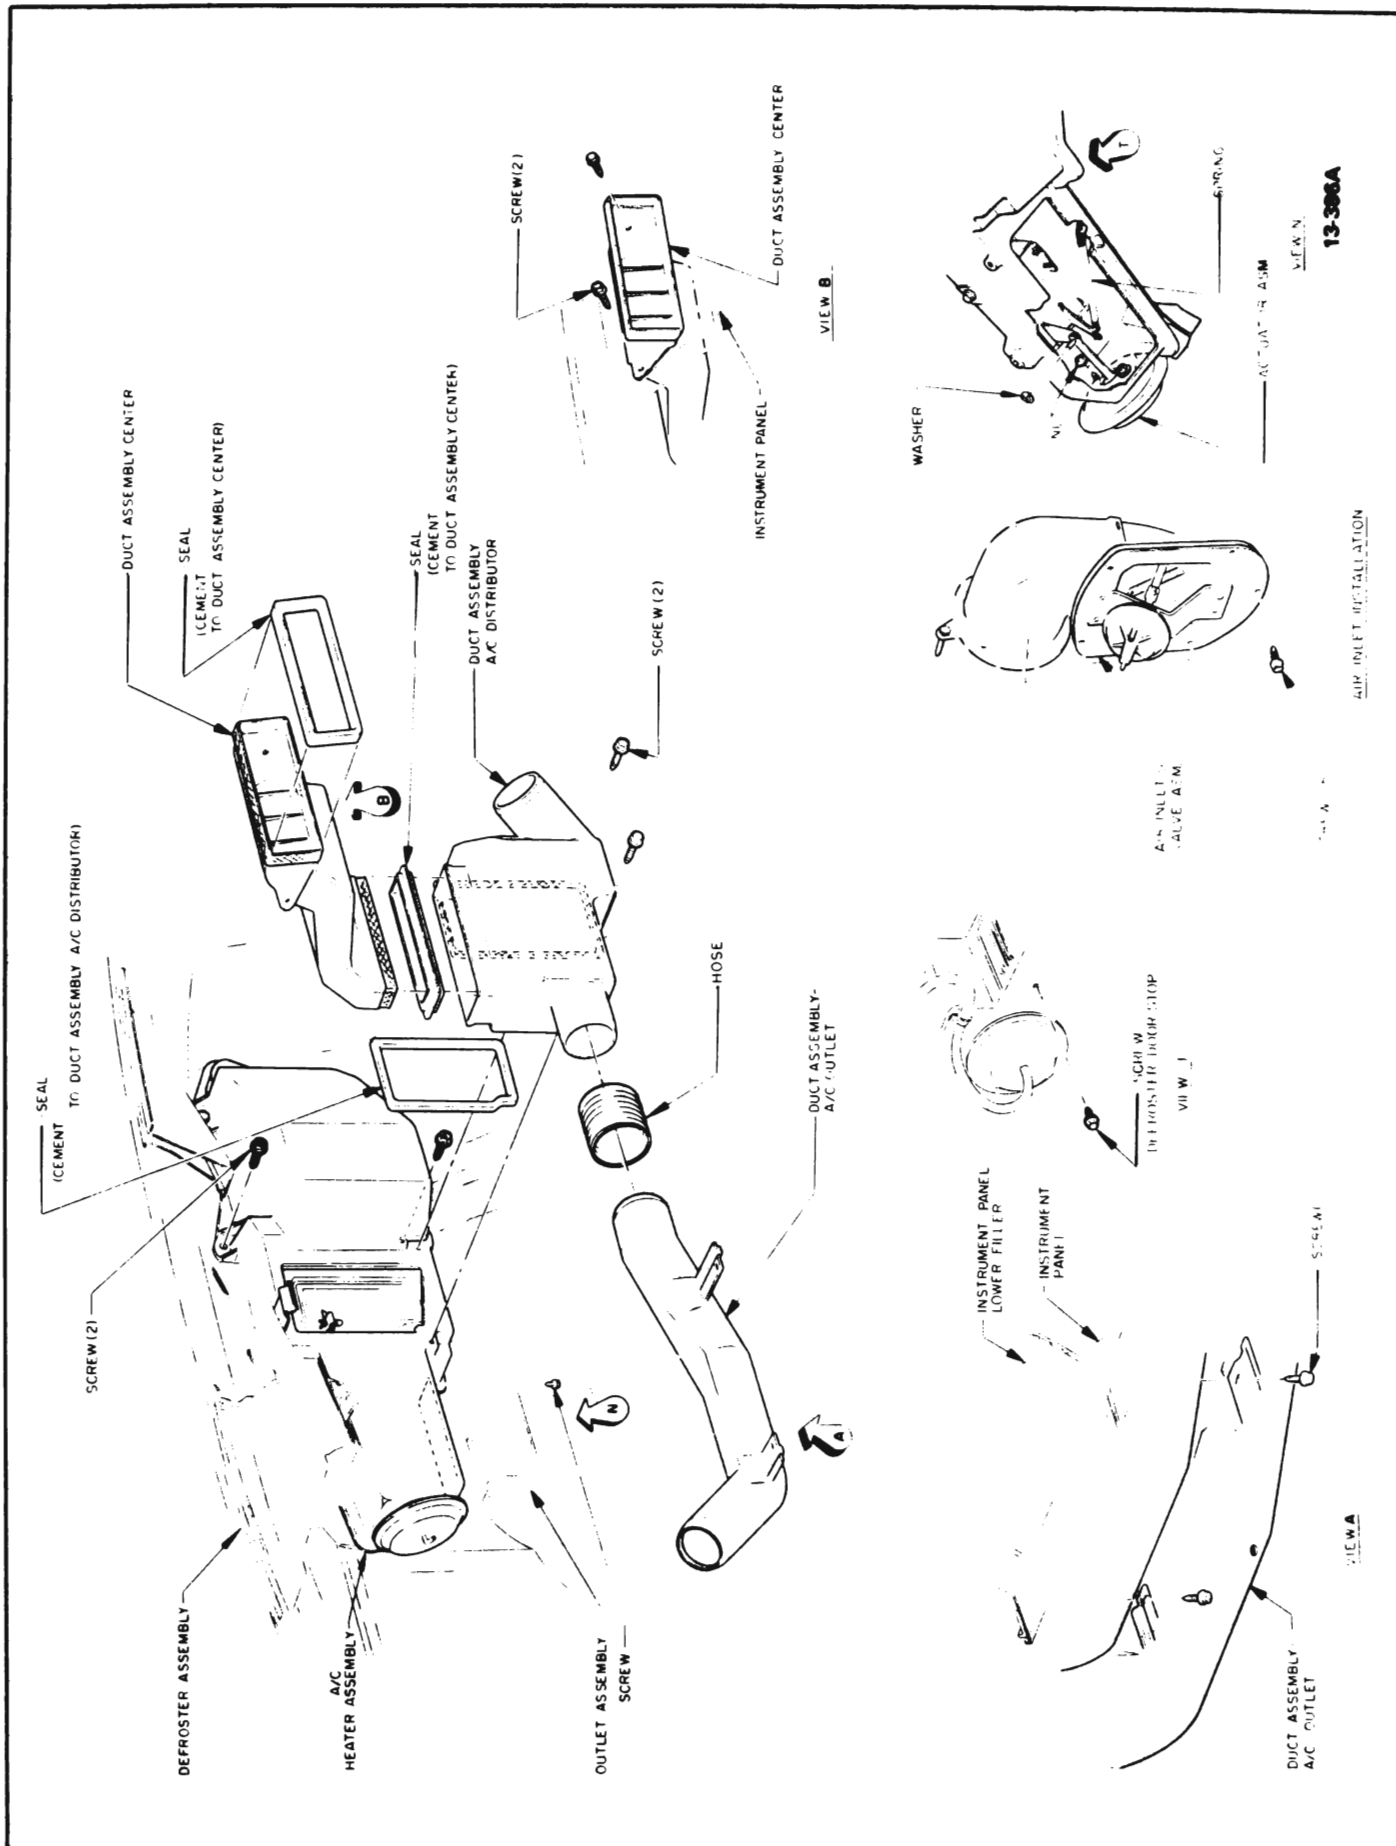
Defroster Assembly and A/C Ducts, 43-44000 Series
